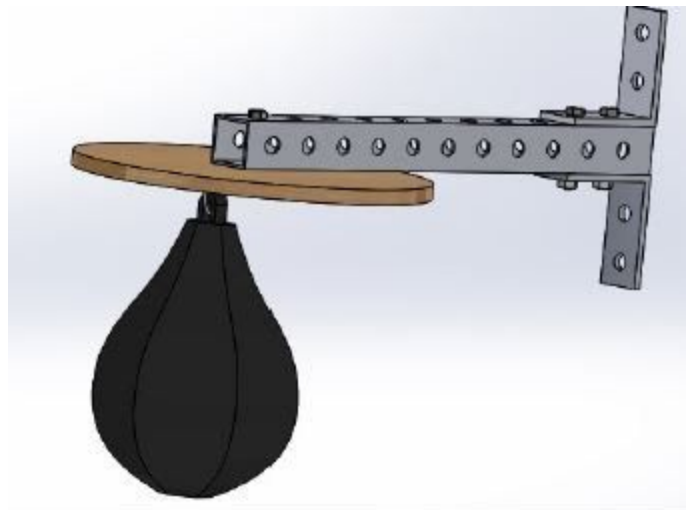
Assembly Model of Punching Bag Apparatus
